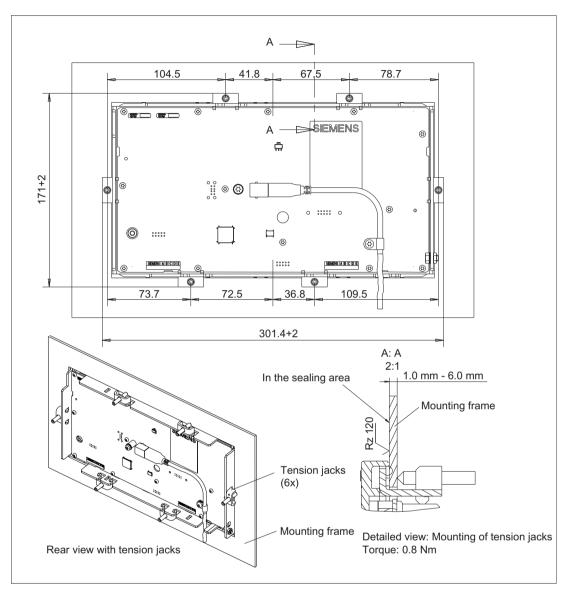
Dimension drawing for mounting the CNC full keyboard KB 310C
